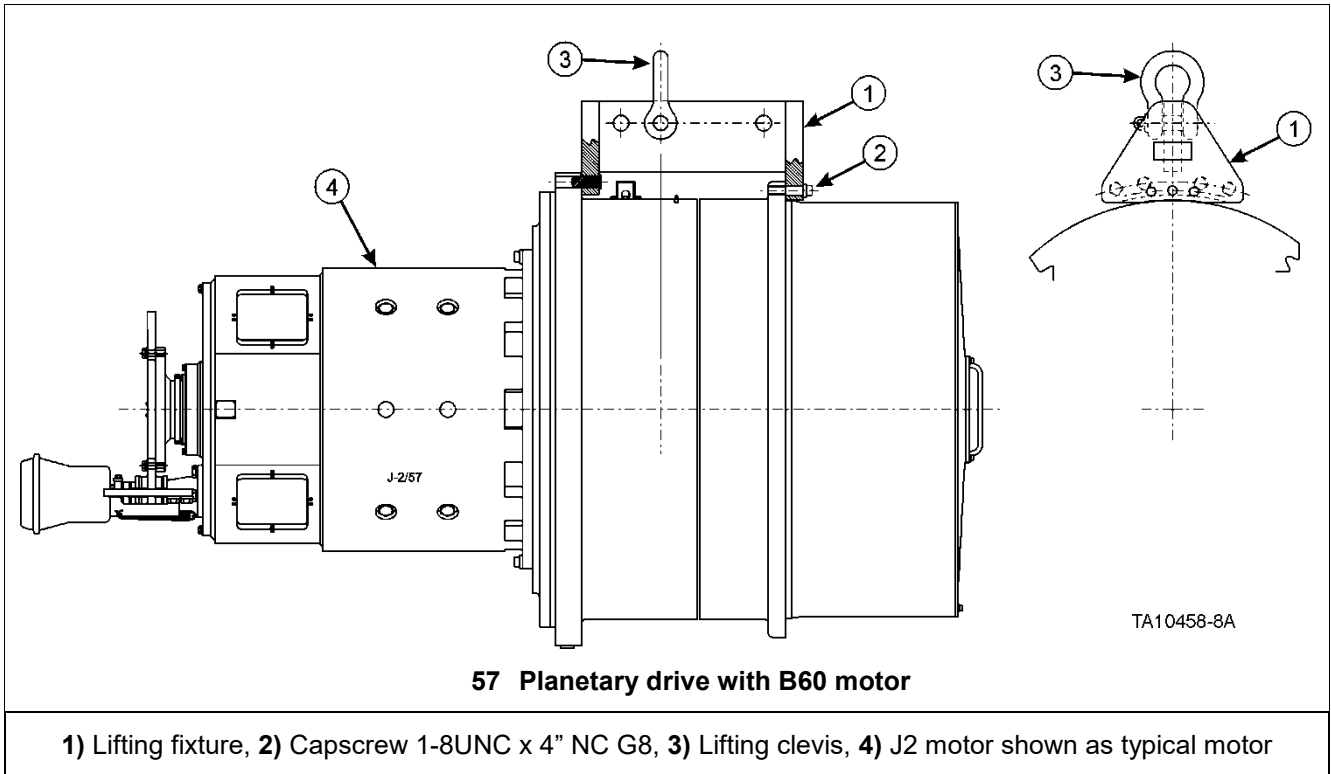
Crane attachment for removal of traction motor/planetary drive/assembly
